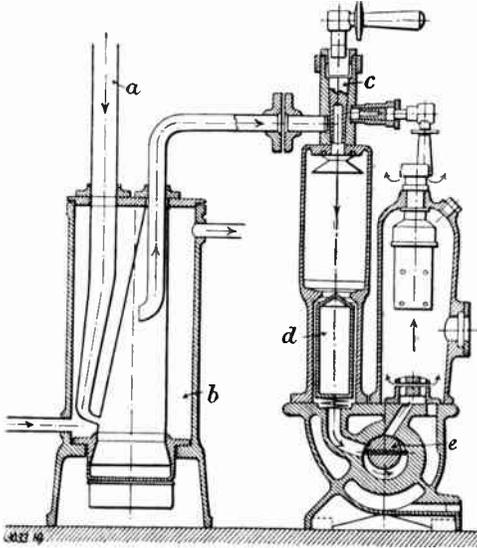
SECTIONAL DRAWING OF THE PUMP USED TO KEEP A VACUUM IN THE INTERIOR OF THE MERCURY ARC RECTIFIER.
